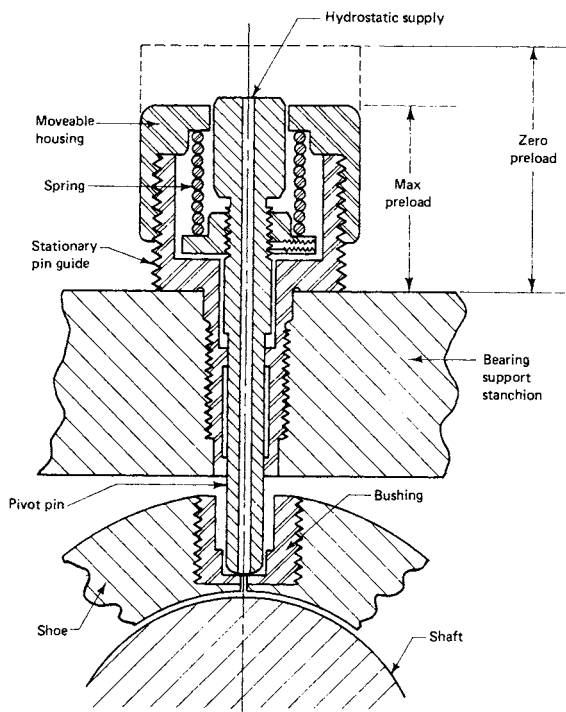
Cross-sectional view, spring-mounted pivot assembly. (Courtesy of The Franklin Institute Research Labs.)
